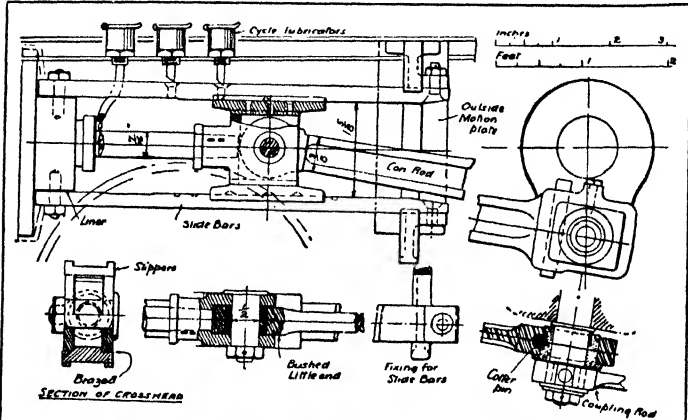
Outside Connecting Rod and Motion with Built-up Two-box Crosshead.
